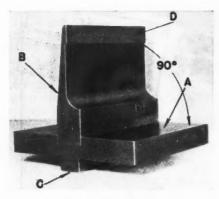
Illustration of a Device for Use in Centering Milling Machine Cutters
